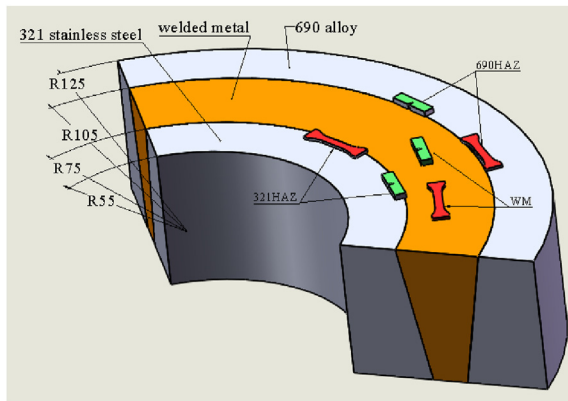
The configuration of the girth dissimilar metal welded joints and the scheme of sample extraction.
